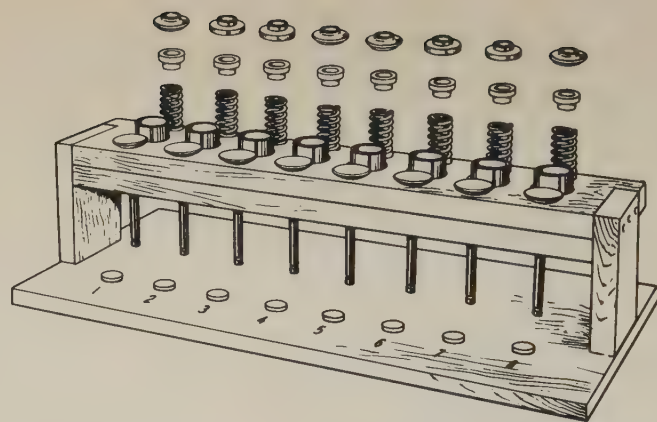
Valve rack for holding valves and valve-train parts. (Homelite)
